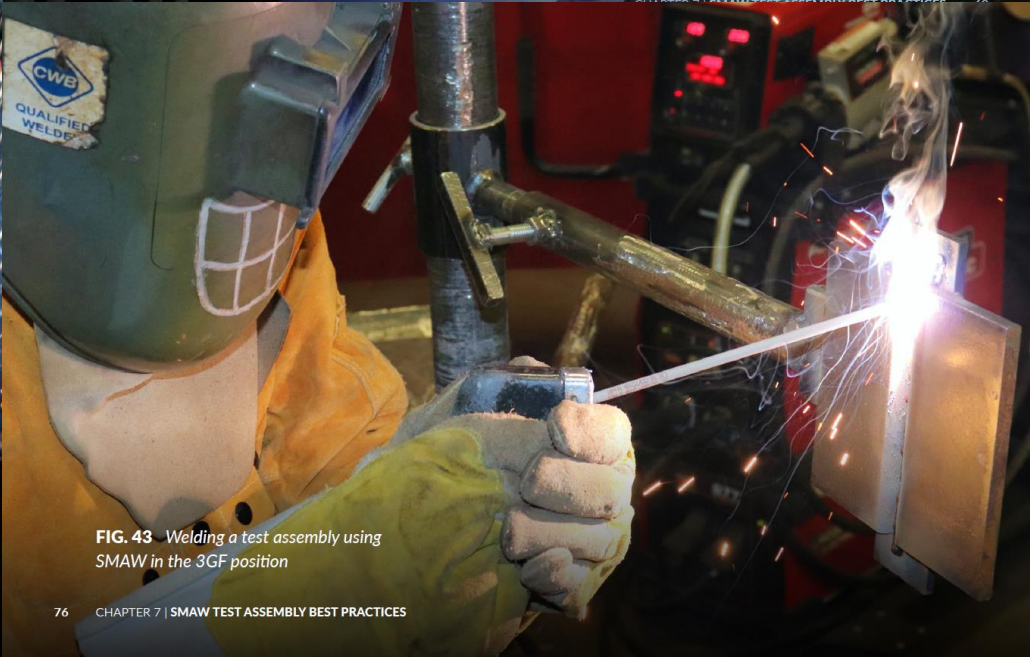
Welding a test assembly using SMAW in the 3GF position
